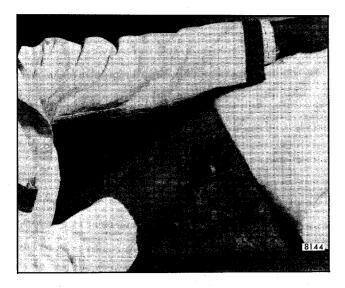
Separating Wrinkled Area from Roof Panel - Flat-Bladed Tool Application
